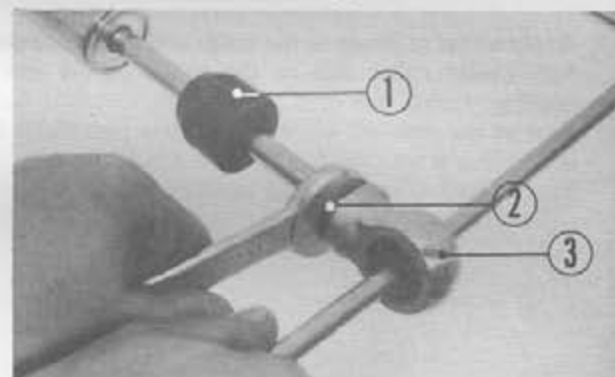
① Rear damper ② 10mm lock nut ③ Upper joint
